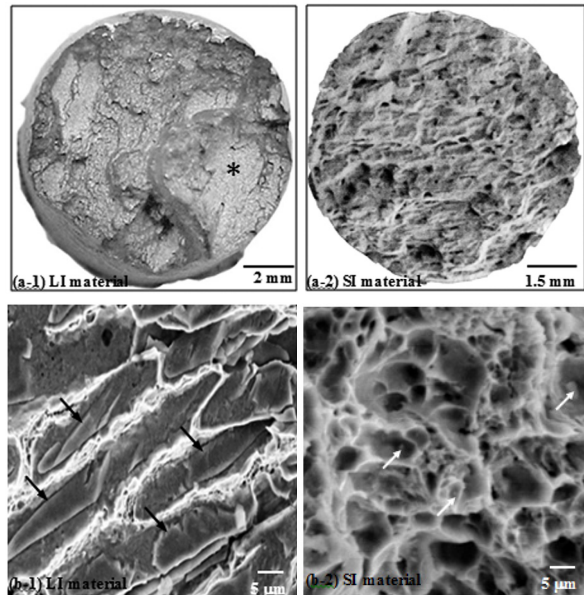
SEM images of tensile fracture surfaces for the (a) overall fracture surface and (b) higher magnification of LI and SI materials.
